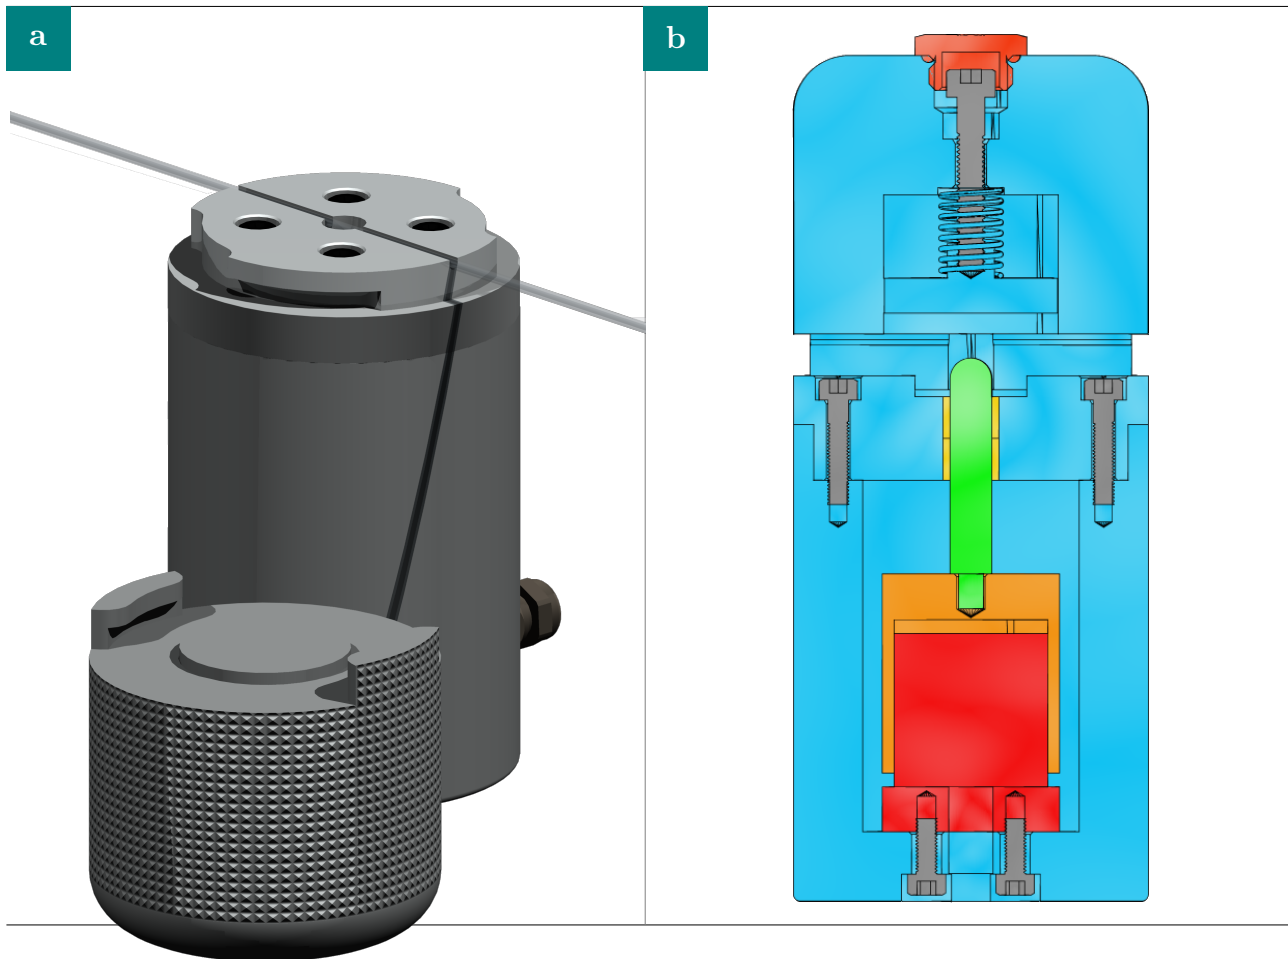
CAD renderings of the final pinch valve design; a) shows an exterior isometric view of the valve with bayonet cap removed and tubing inserted, b) shows a cross-section of the valve and its major components.
